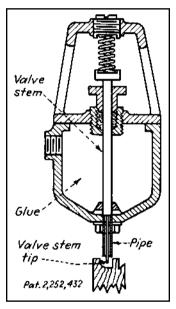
A shoulder on a valve stem in a glue chamber retains glue until pressure on the tip opens the bottom valve.
